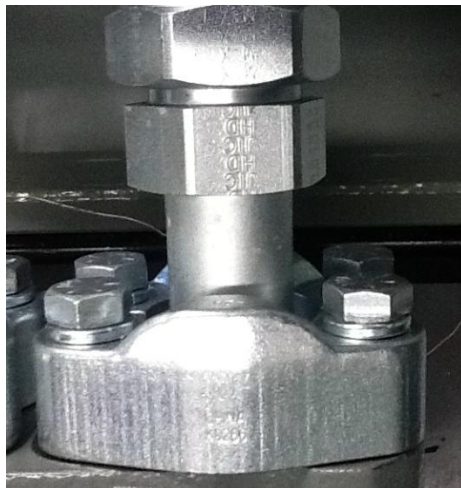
Code 62 SAE J518 flange connector with four-bolt attachment.
